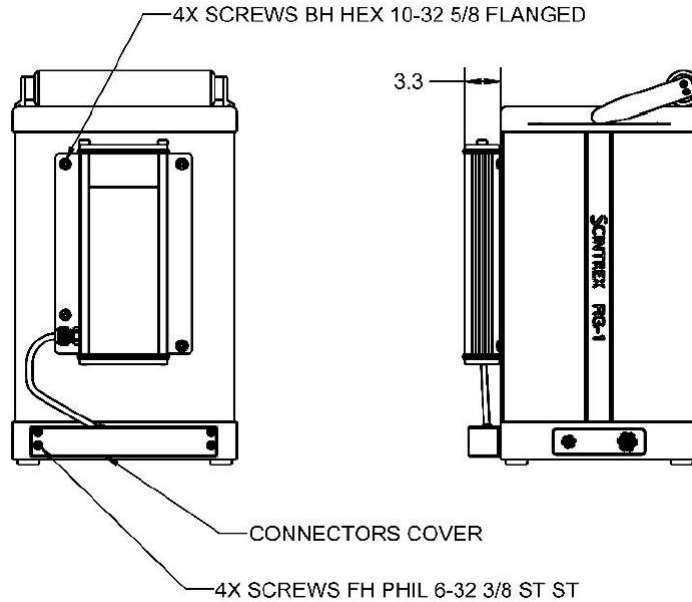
RG-1 Battery Assembly Storage Bin
